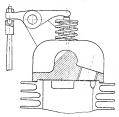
Details of the air-cooled cylinder-head, designed 1932
